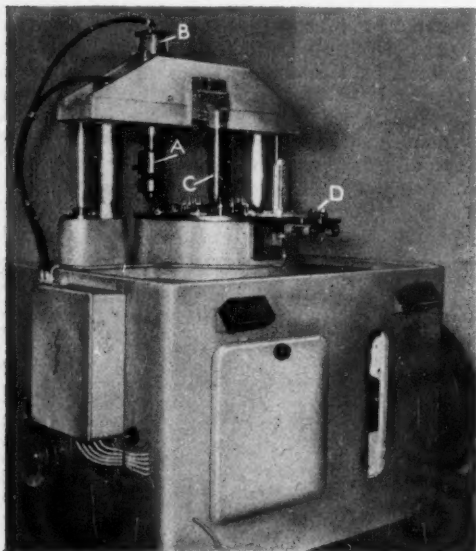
This Countersinking and Marking Machine has Been Built by Benelli-Gavazzi and Incorporates Standard Units from the Company's Rotary and In-line Transfer Presses
